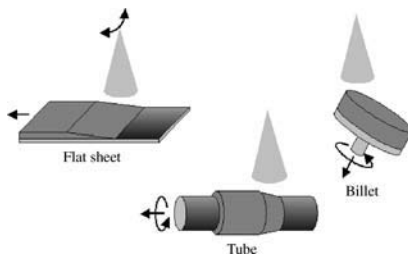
A schematic of the production of flat sheet, billet and tube by spray forming.
